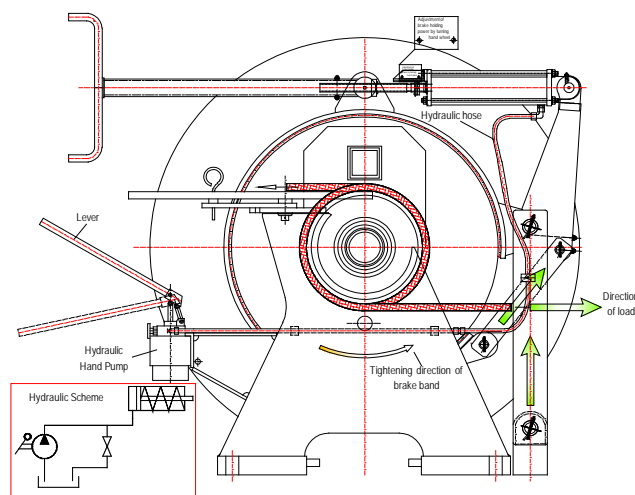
Spring-applied band brake with hydraulic (hand pump) release. Source: TTS Kocks GmbH, Bremen.
